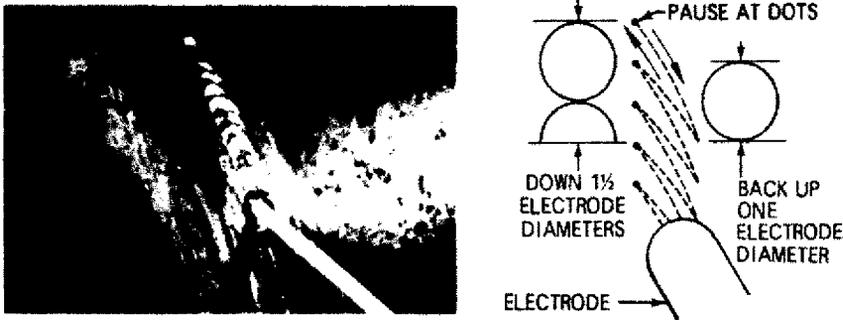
Whipping procedure used to weld the hot pass.
